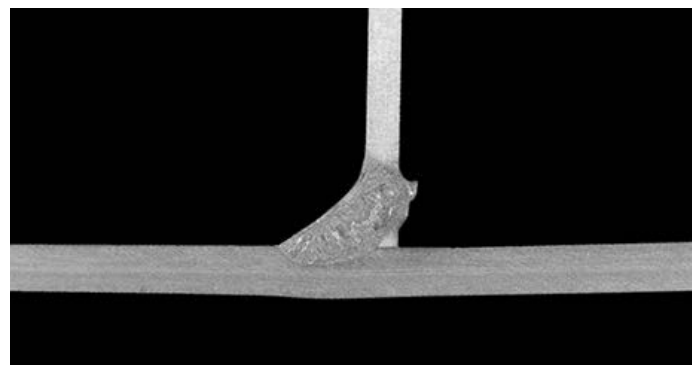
Macrostructure of a T-joint with excessive melt-through of the vertical element being welded with excess penetration bead on the joint root side
